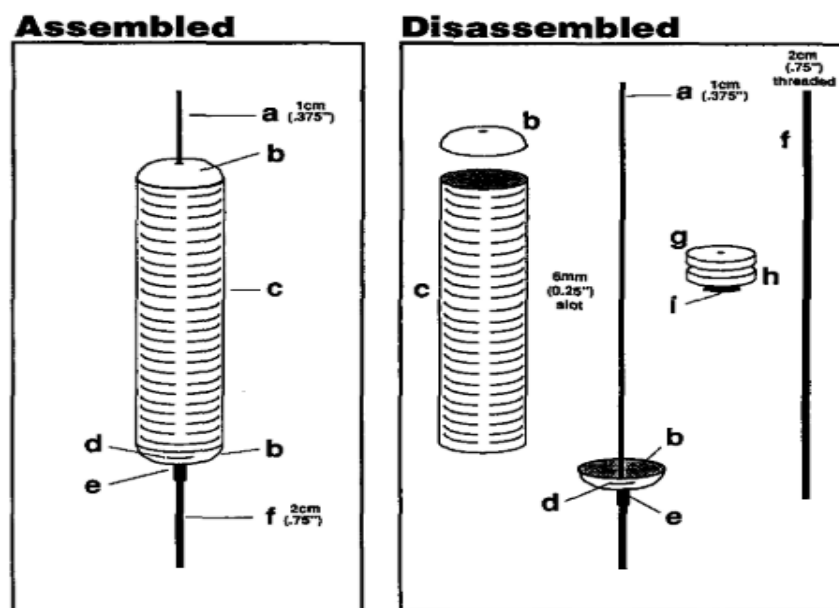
components of a simple water-level gauge: a) 1 cm diameter stainless rod; b) 10 cm PVC slip cap; c) 10 cm slotted well screen; d) 1 cm diameter welded steel washers; e) galvanized 2 cm diameter pipe coupling; f) 2 cm steel pipe with threaded upper end; g) Styrofoam floats; h) aluminium needle; rubber washer. Figure adapted from (Saxon & Dye 1995).
